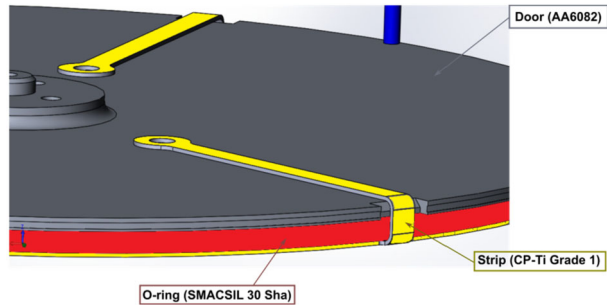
Door to o-ring coupling, the CP-Ti strip ensures electrical continuity between door and baffle, and structural integrity in case of failure
